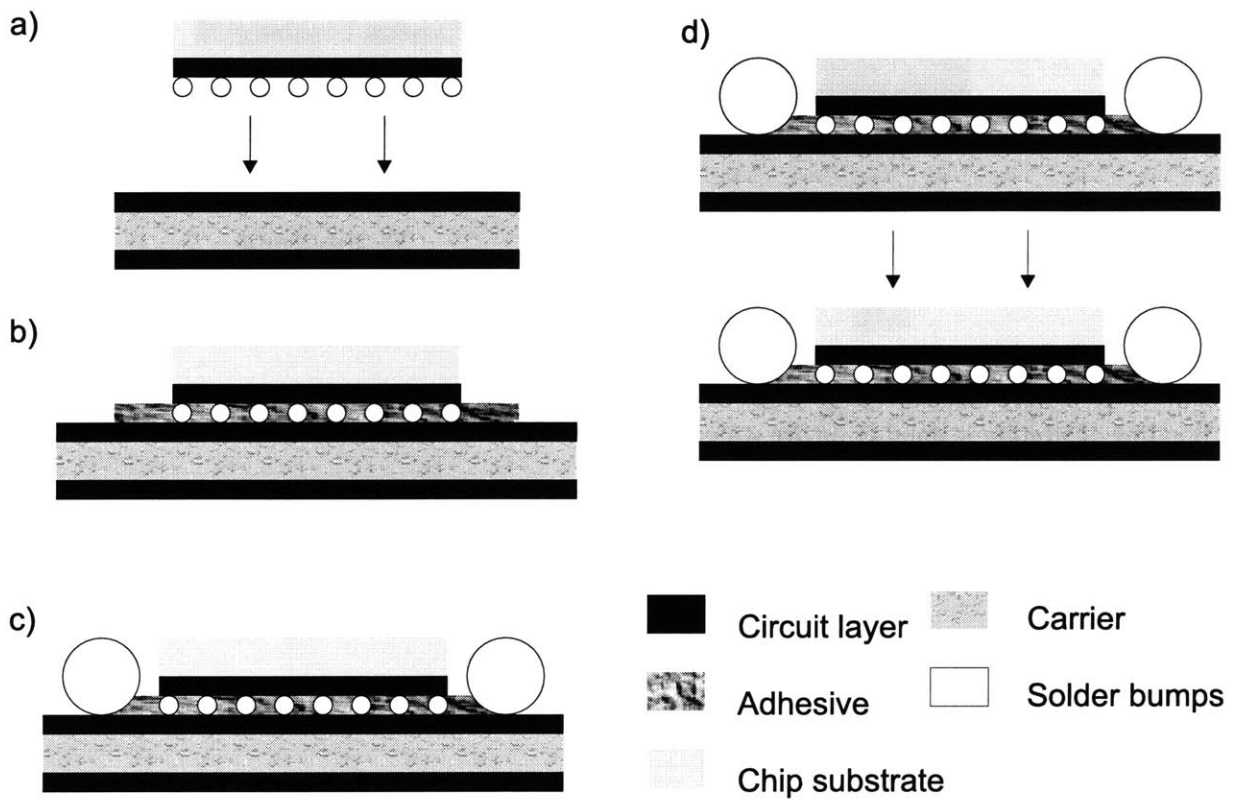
Layer transfer using flip-chip bonding. *a*. Solder ball electrical interconnection between chip and carrier; *b*. Chip-to-carrier bonding using polymers; *c*. Solder ball formation for carrier-to-carrier interconnection; *d*. Carrier-to-carrier bonding
